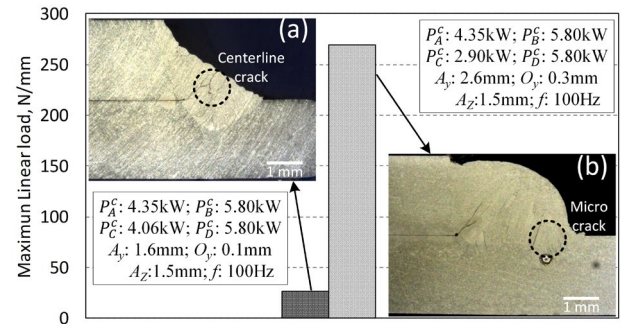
Improvement of joint strength and suppression of centerline cracks by optimisation of welding parameters with welding set-up #5 at  $S_x=4$ m/min.
